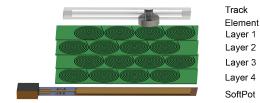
Exploded view of the PCB micro-coil system, consisting of a RTE, a linear track, flexible circuit layers containing interleaved electromagnetic coils, and a soft potentiometer.
